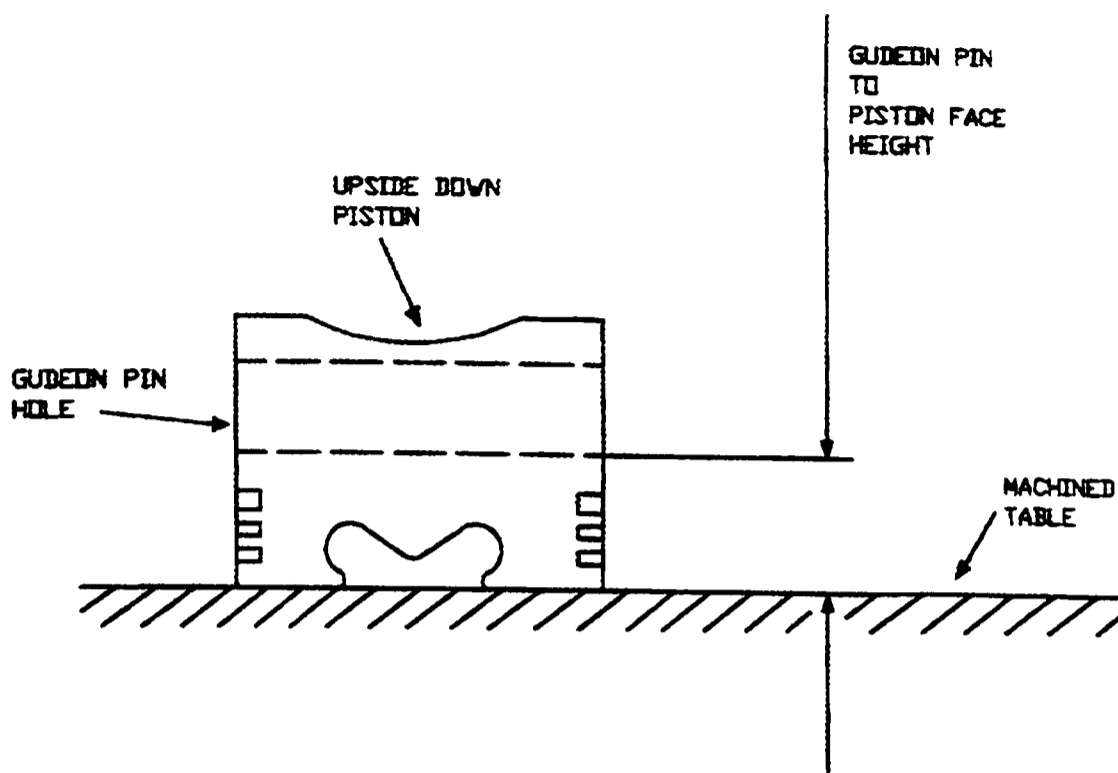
Measurement of the gudgeon-pin to piston top face. Measurement was performed using a dial gauge, mounted on a magnetic base.
